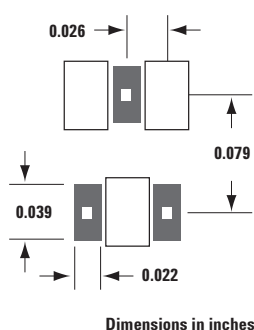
Recommended PCB Pad Layout for Avago's SC70 3L/SOT-323 Products.
